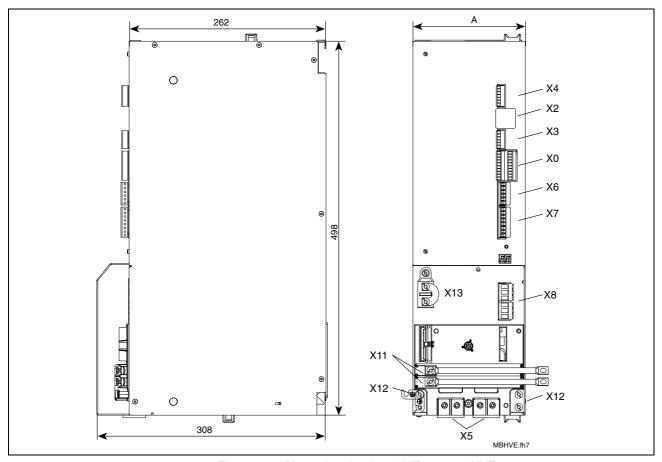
Dimension drawings HVE02.2 and HVE03.2
